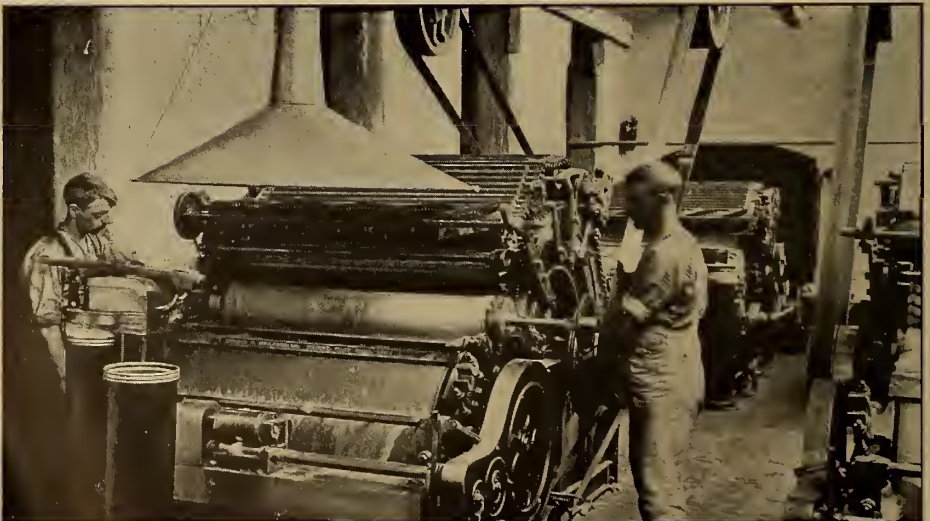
THE STRIPPING PROCESS ON A CARDING ENGINE
